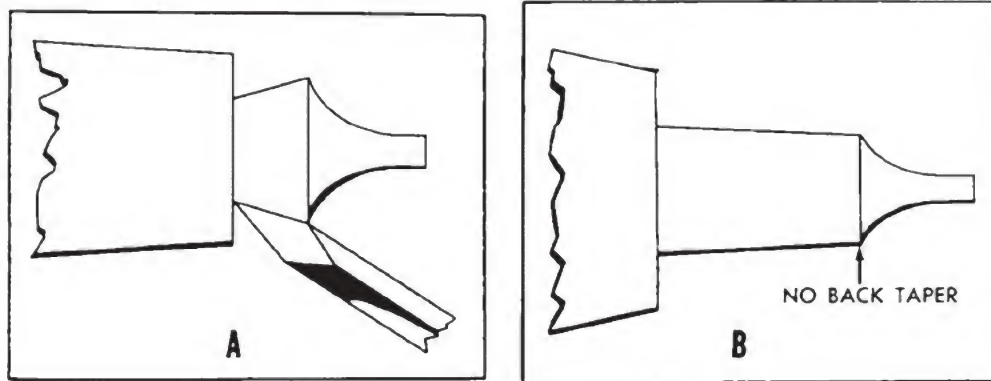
Cutting a back taper on the lower cone; cone without back taper.
